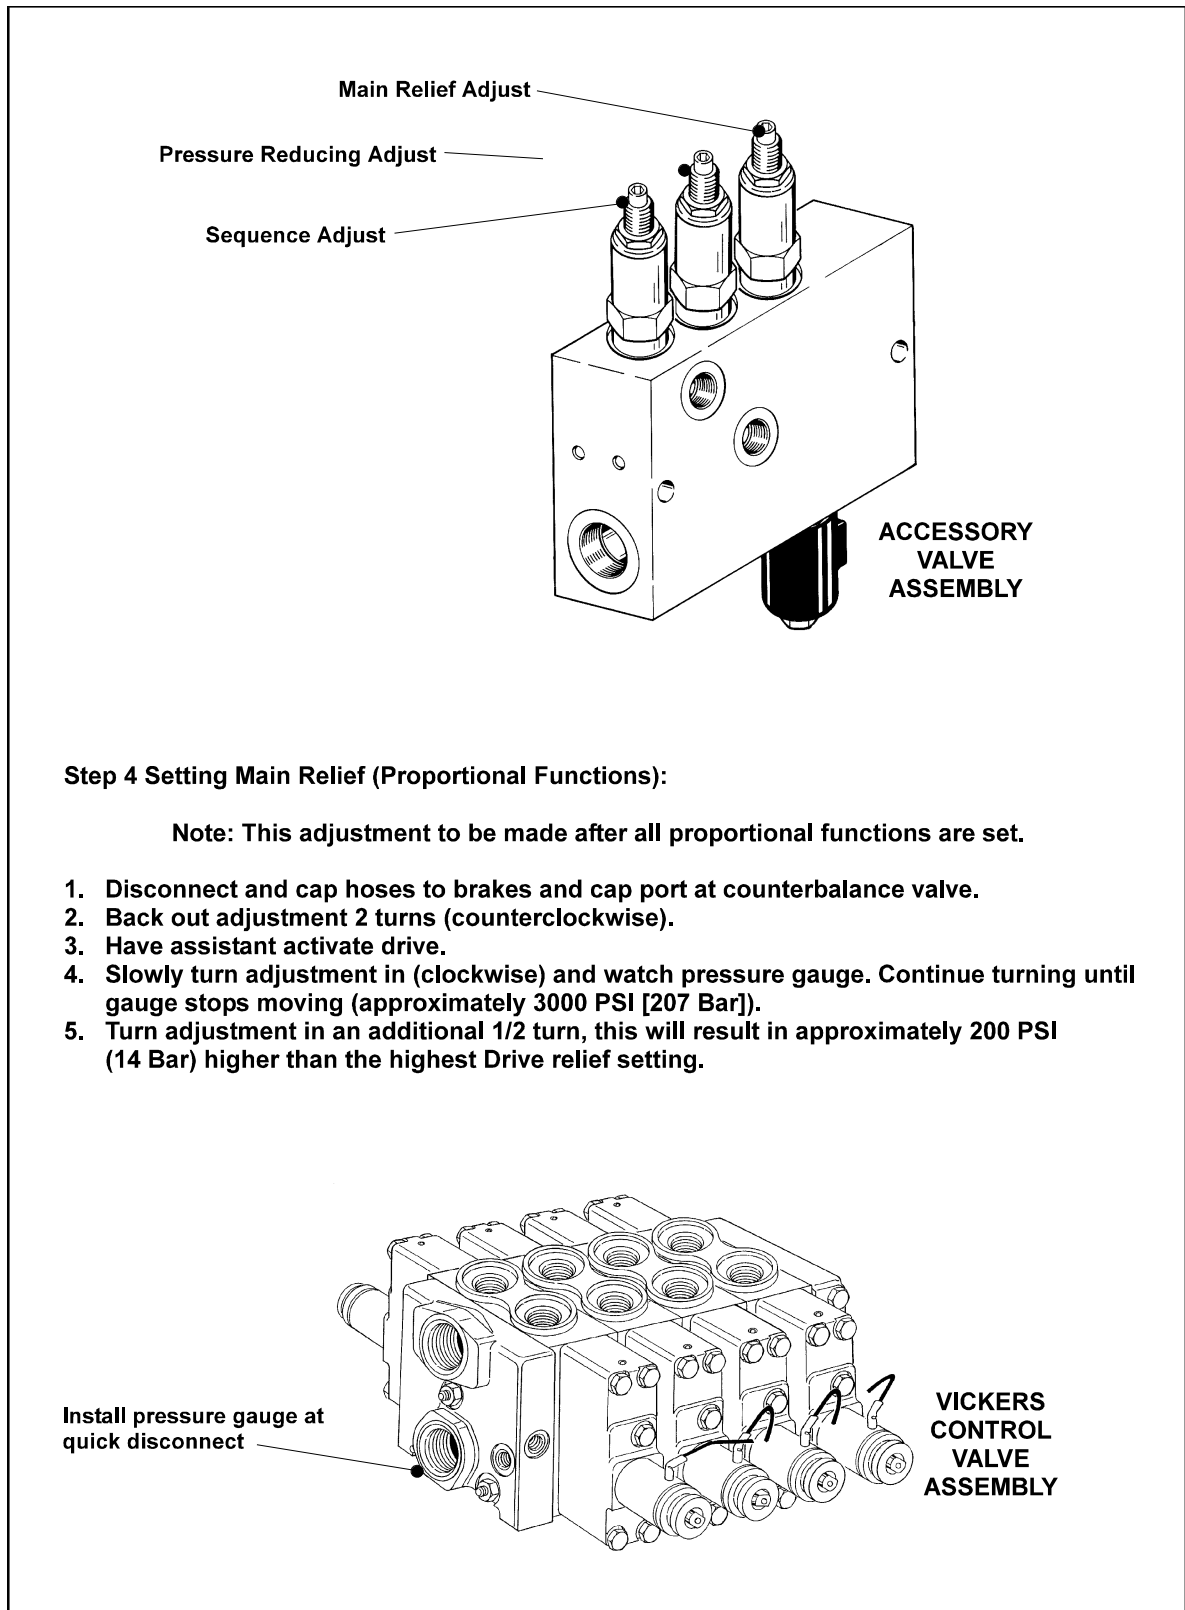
Pressure Setting - All Hydraulic Machines (Sheet 3 of 4)
